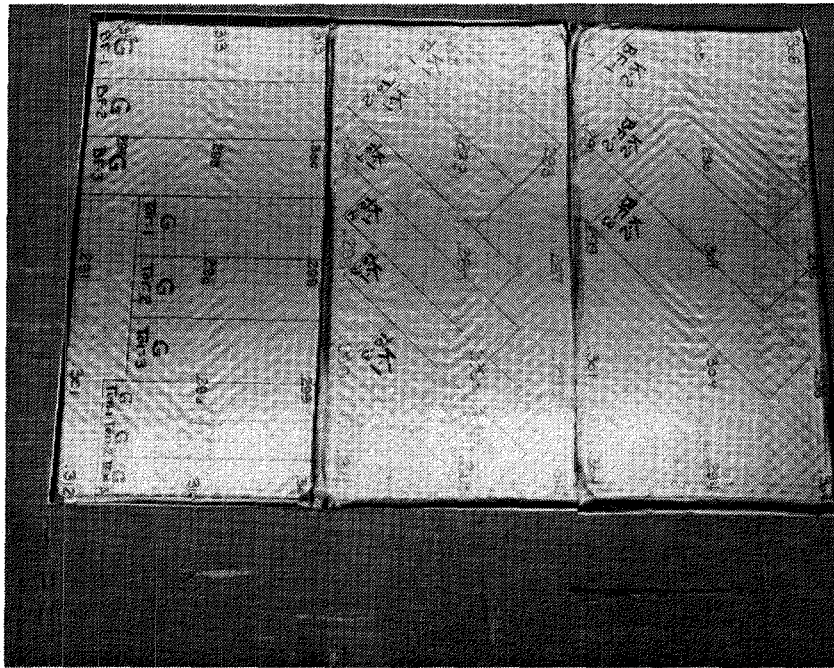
Panels G, K1, and K2 Showing Thickness and Specimen Layout
